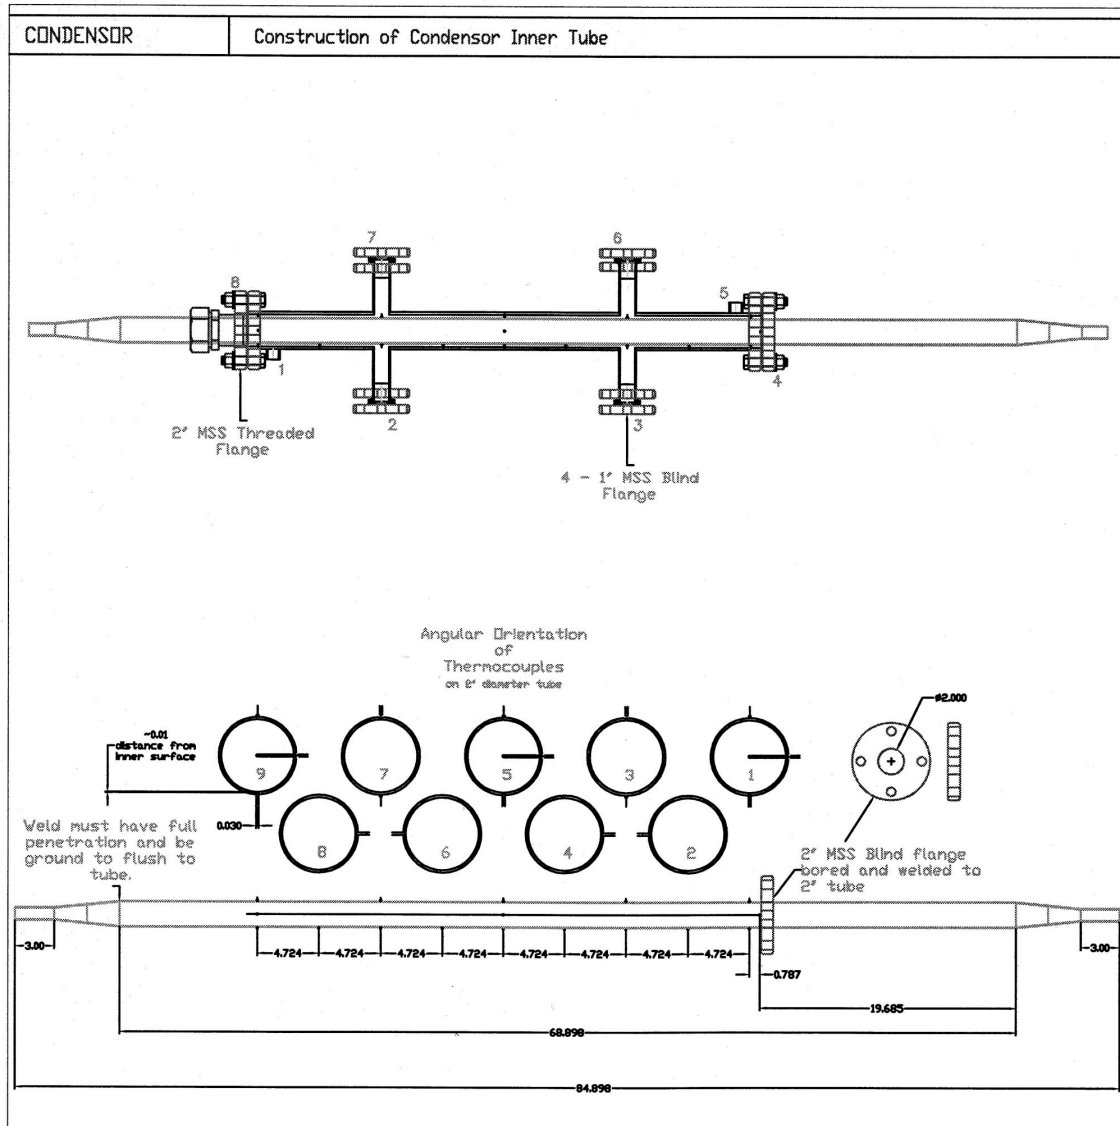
5.04 cm Condenser Tube Design and Assembly
